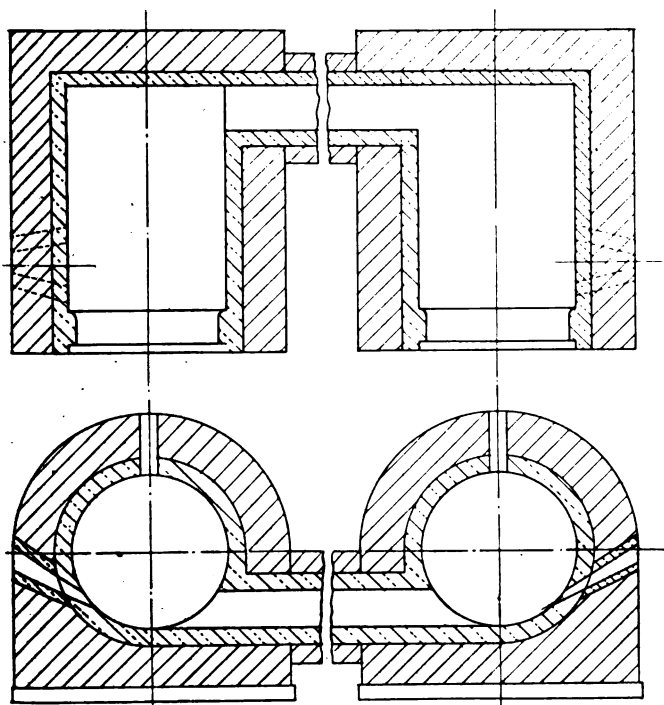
Two single door forge furnaces for reheating ingots and half finished forgings. The waste gases of either furnace can be used for preheating purposes.
